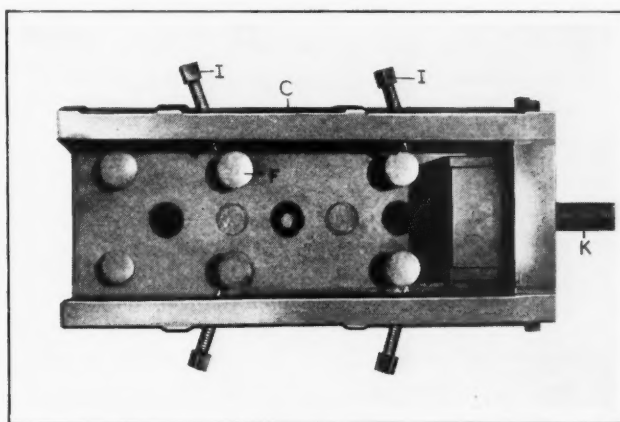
Fixture Used in Machining Locomotive Shoes and Wedges
